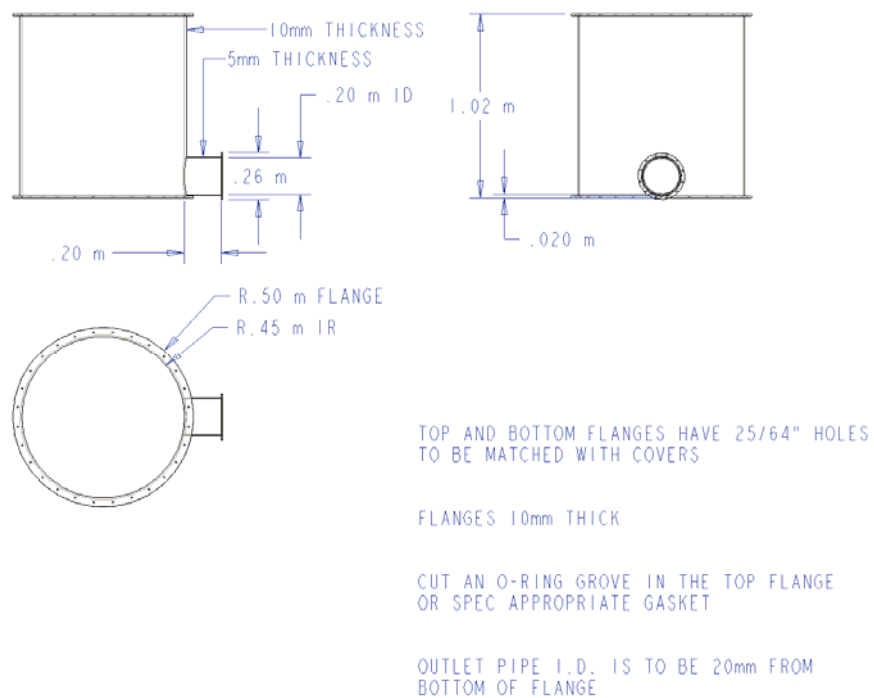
Flanged tank dimensions; tanks have covers on both top and bottom to facilitate cleaning.
